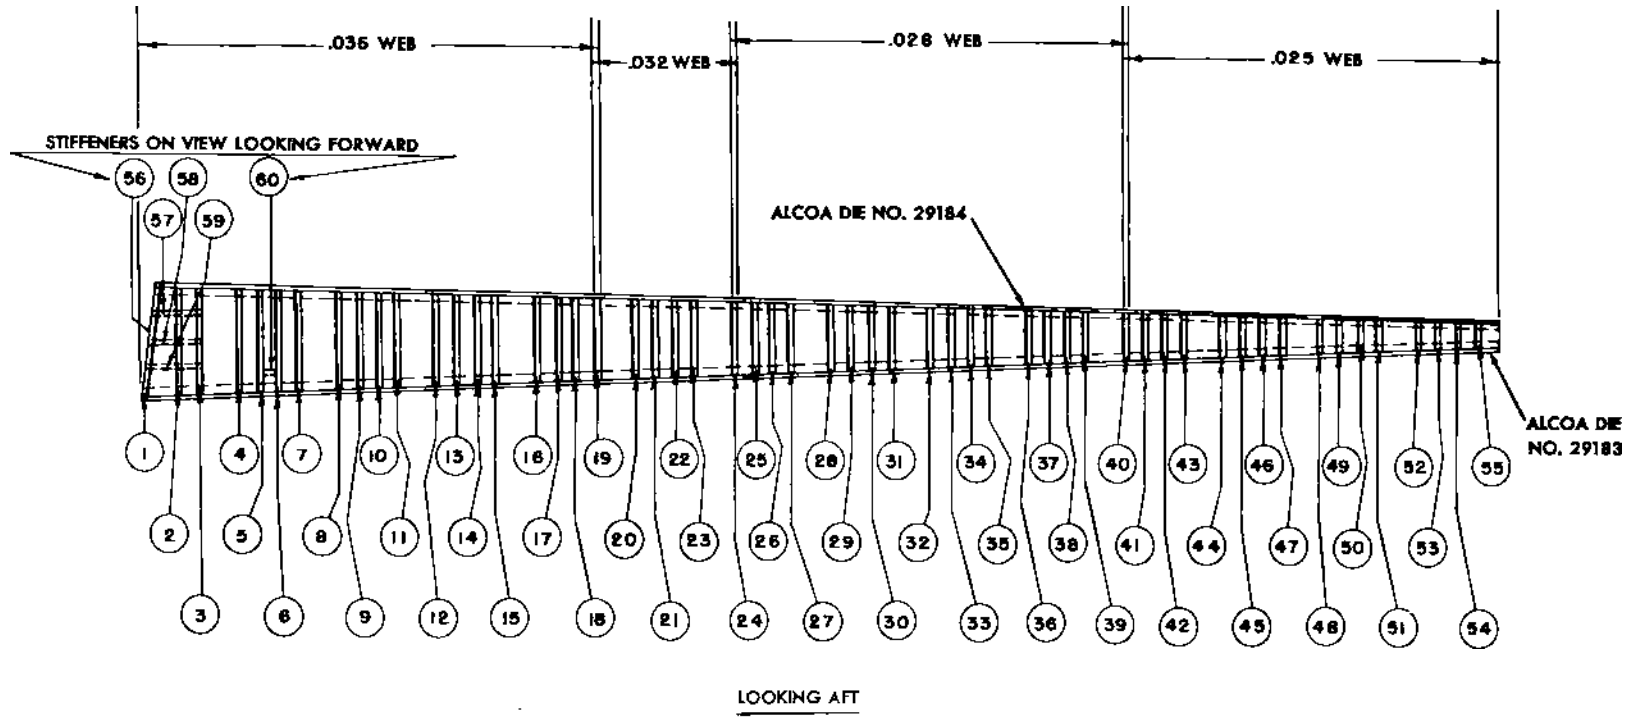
WING SPAR ASSEMBLY CENTER PANEL 70%
